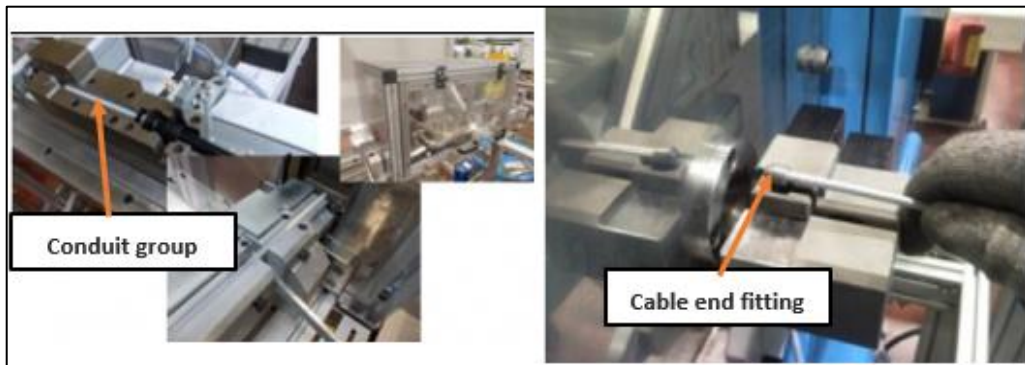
Introduction of the conduit group on the jig (left) and cable end fitting on the radial press (right)
